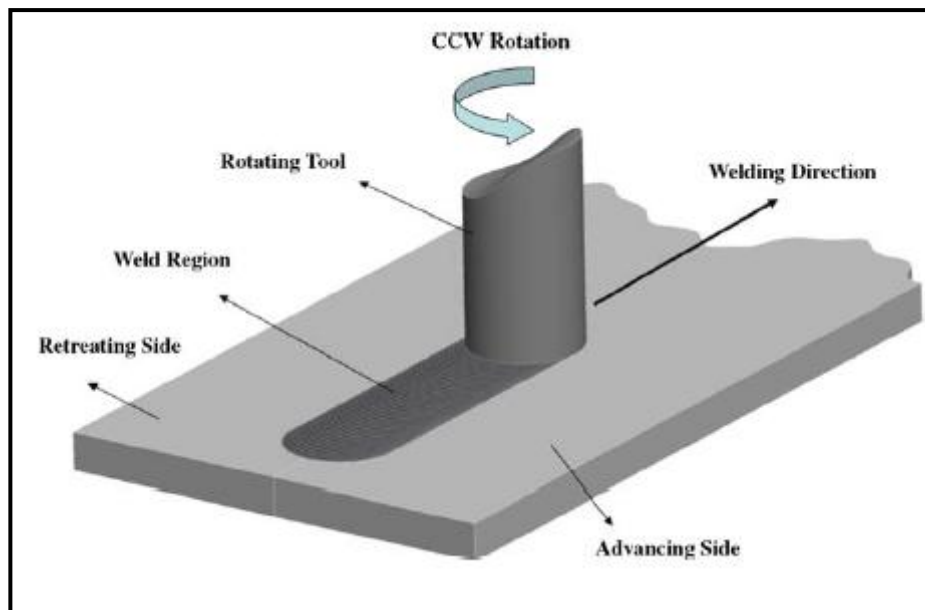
Schematic diagram of Friction Stir Welding process
